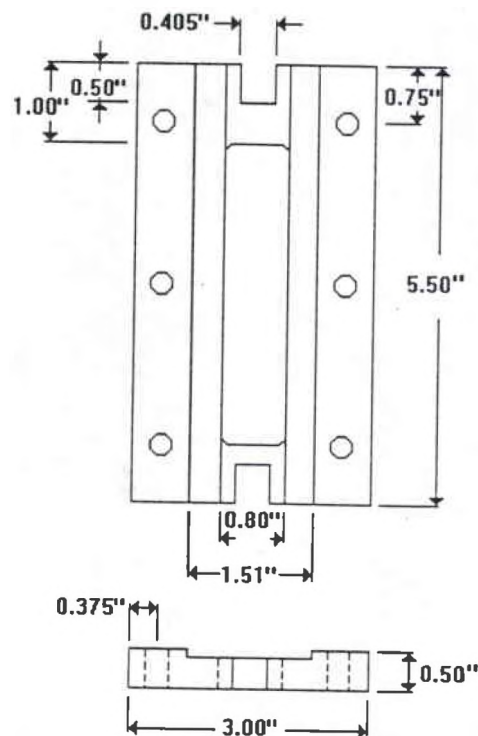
Schematic of support plates of the edge stabilized compression fixture.
